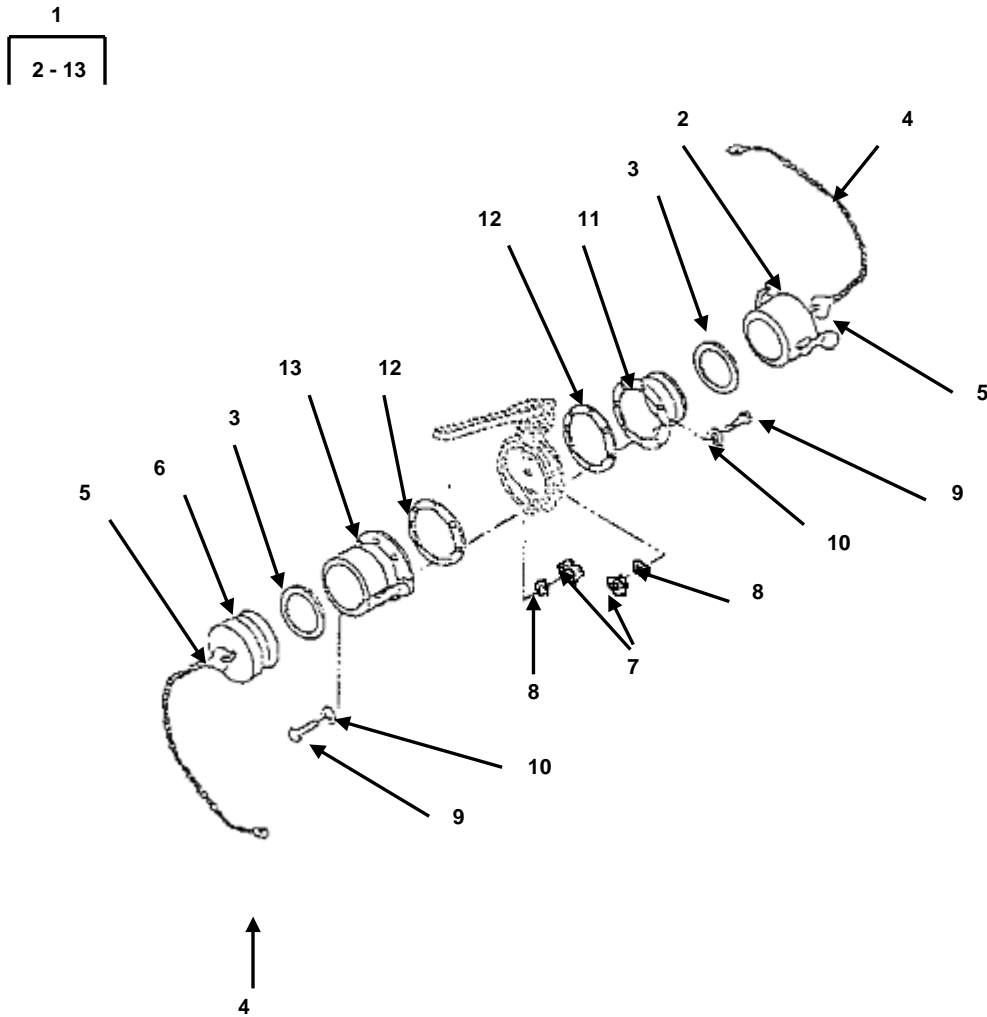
Filler/Discharge Valve Assembly (Butterfly Valve)
